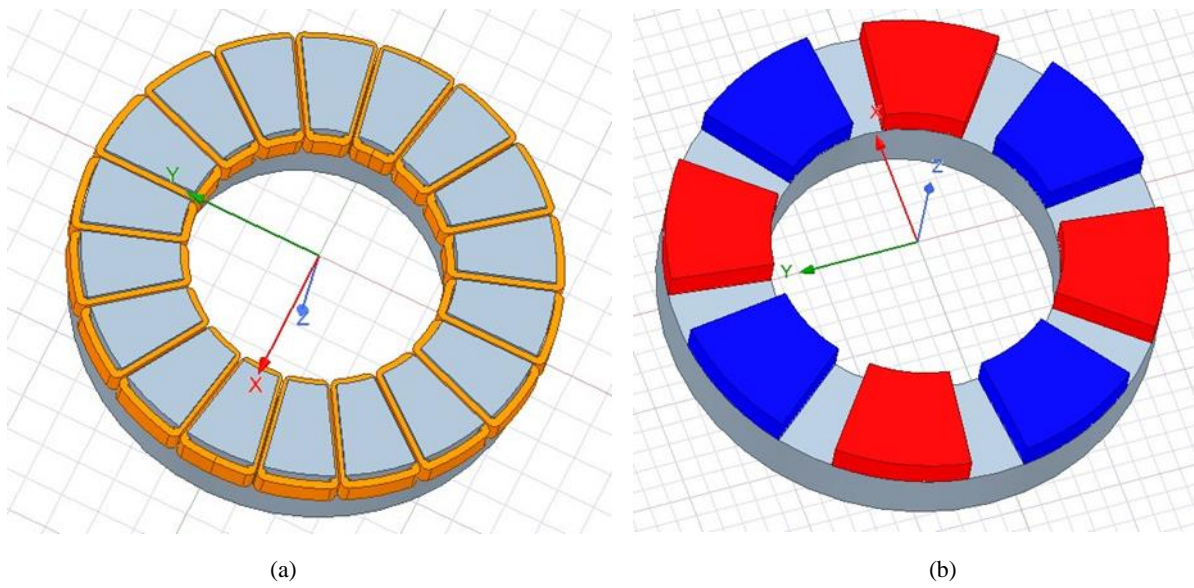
Design of the AFPMSG in Maxwell 3D: (a) Stator part, (b) Rotor part
